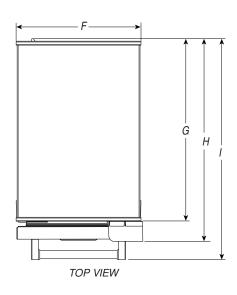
DETAILED PLANNING DIMENSIONS 15" ICE MACHINES
